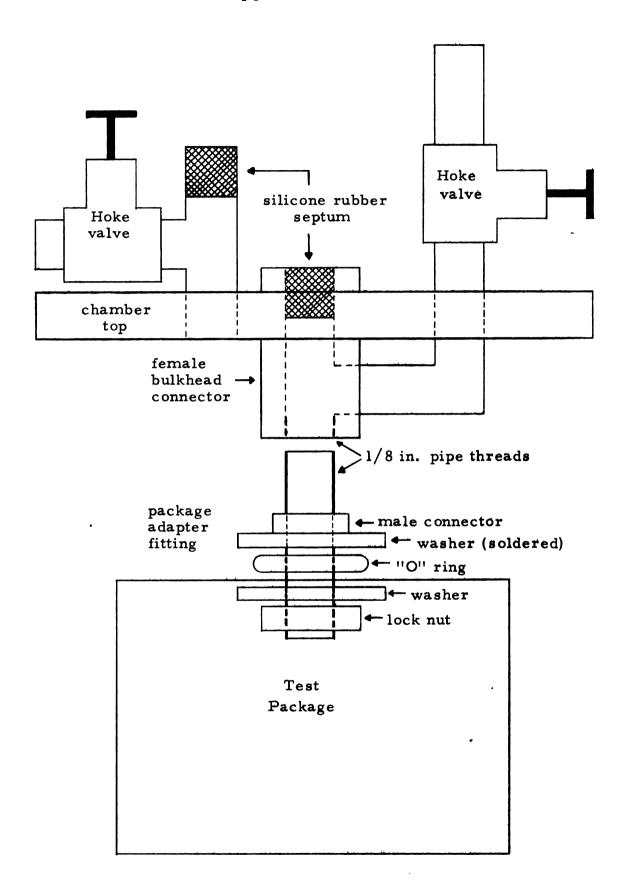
Female bulkhead connector/package adapter fitting assembly sequence.
